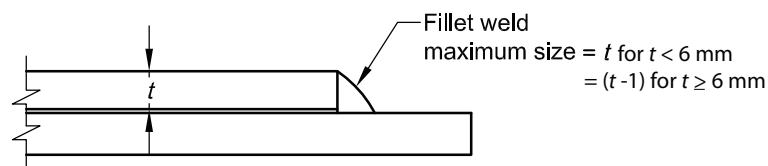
FILLET WELD SIZE IN LAPPED PLATES
